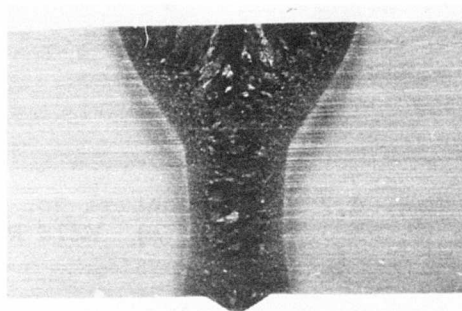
WELD CROSS SECTIONS (TITANIUM ALLOY) TEST
